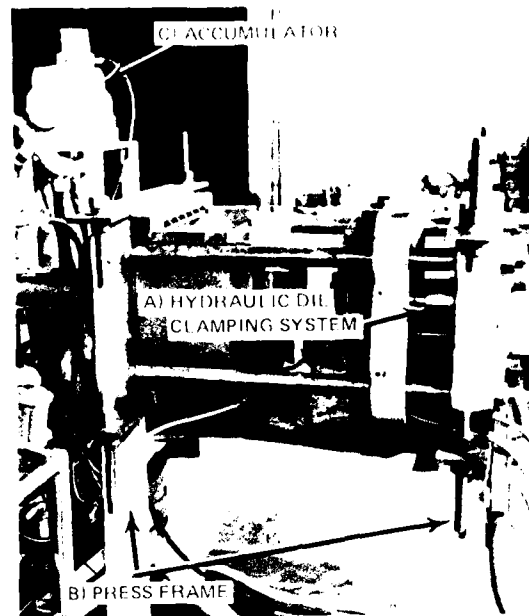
Machine Casting Unit Showing A) Hydraulic Die Clamping System, B) Press Frame and C) Accumulator
